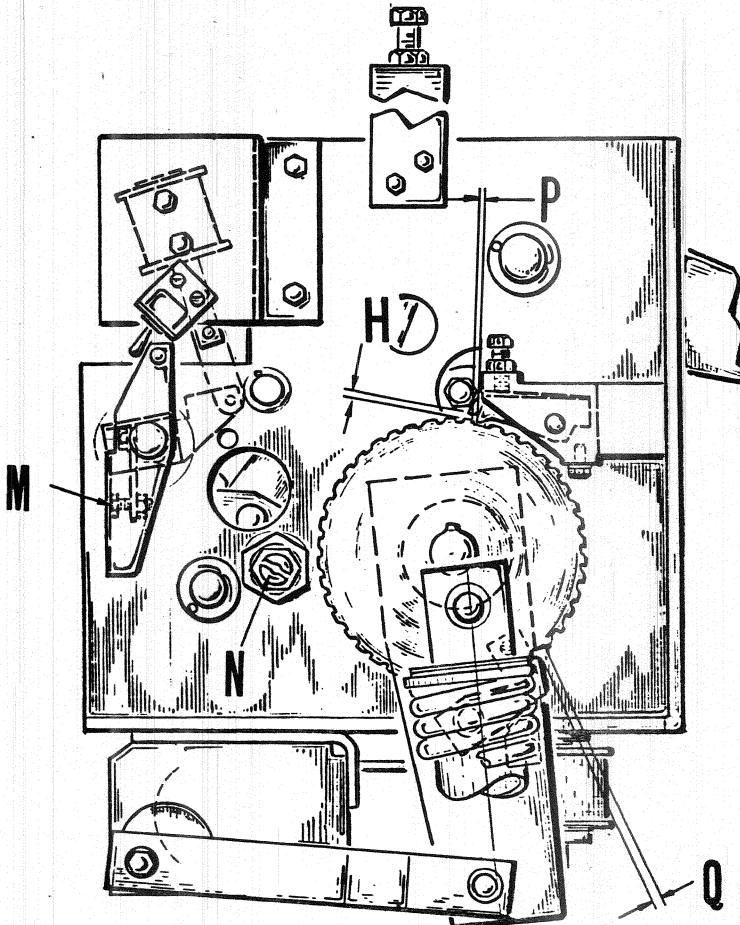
Right Side View Adjustment and Final Clearance Checks
